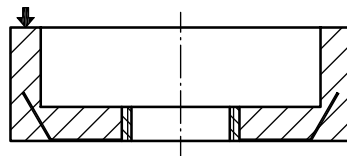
Shape type 6 with prong anchor bushing and thread insert
